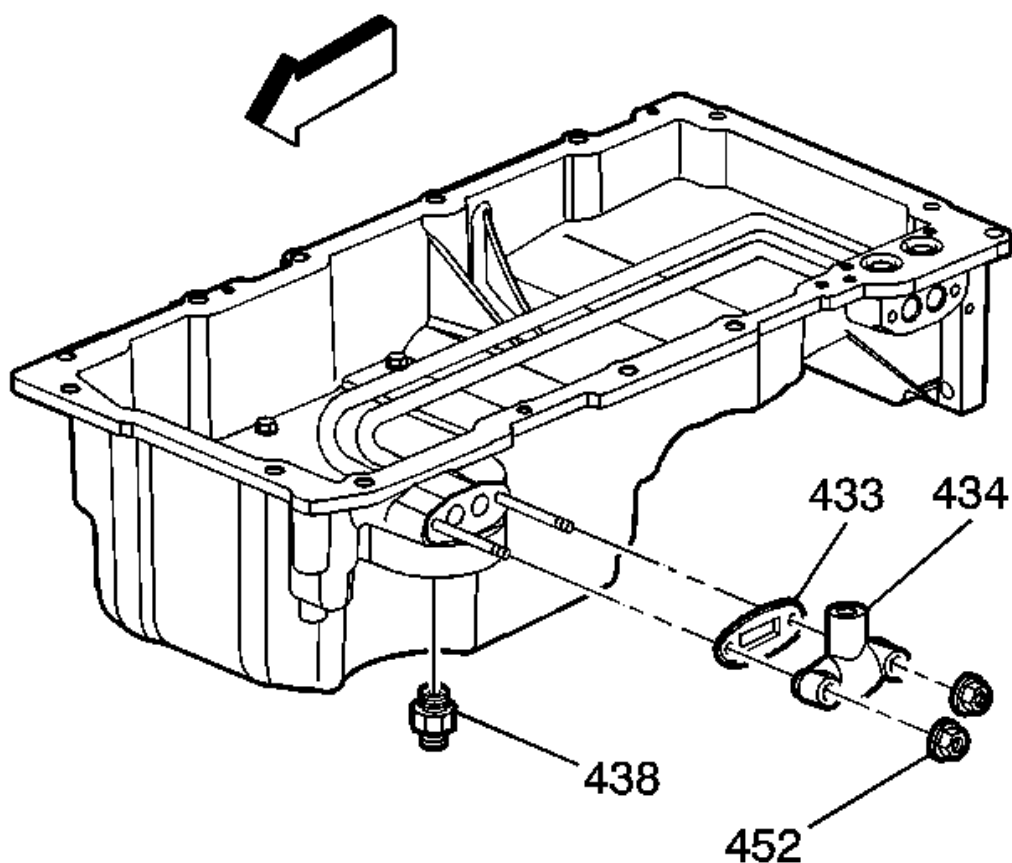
View Of Oil Pan Cover, Gasket & Nuts
